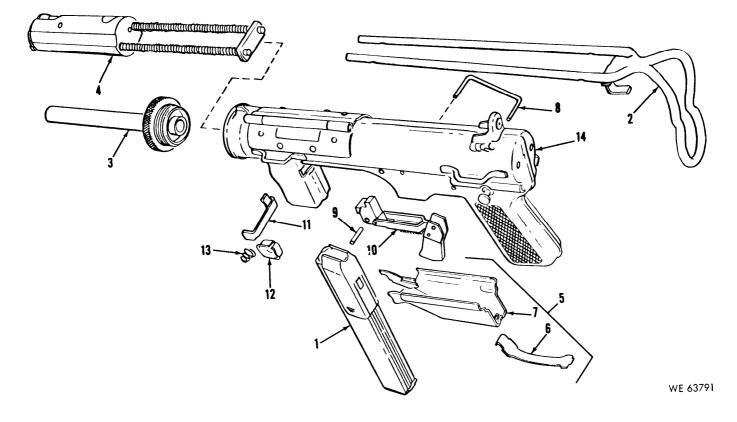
Submachine Gun, Caliber .45, M3A1 only- major groups, assemblies and components.
